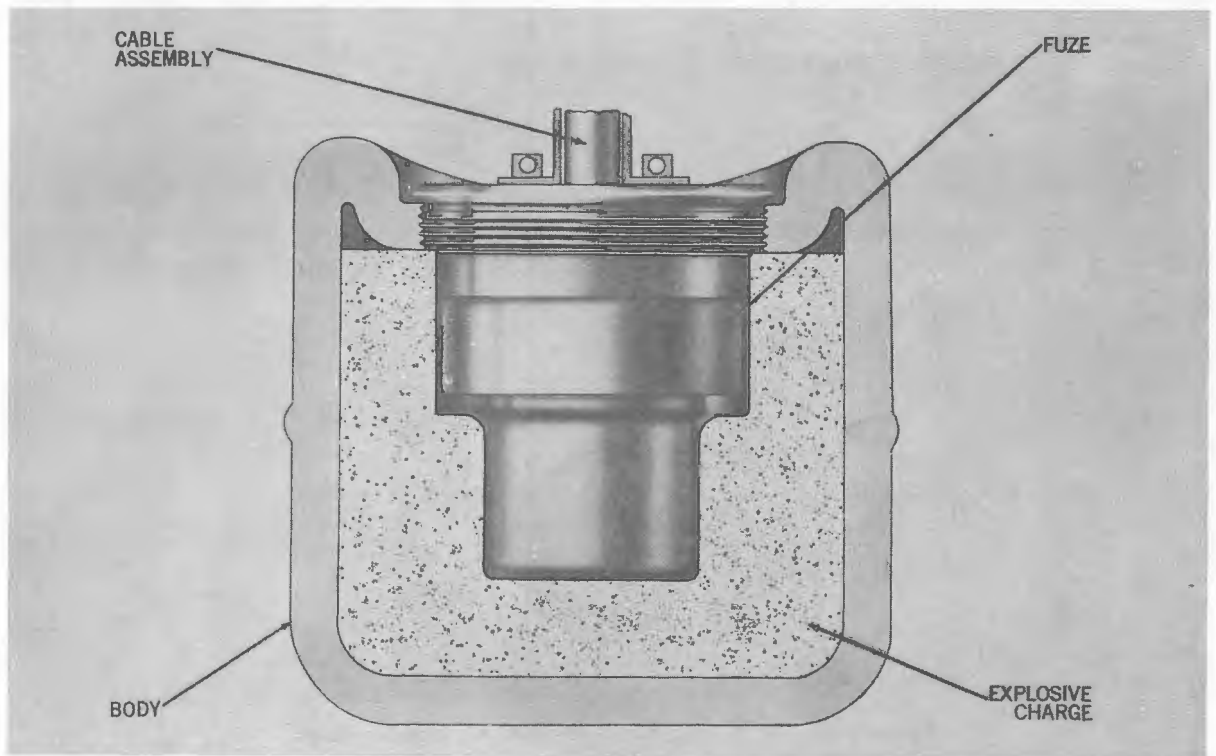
4-lb Frag Bomb M83, Cutaway View.
